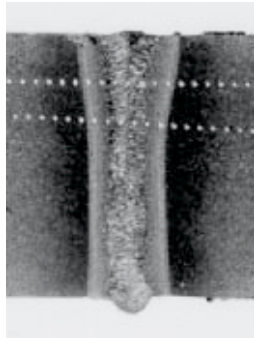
Hardness (HV5) and weld appearance for WELDOX 960 (10 mm) and HARDOX 400 (10 mm).
